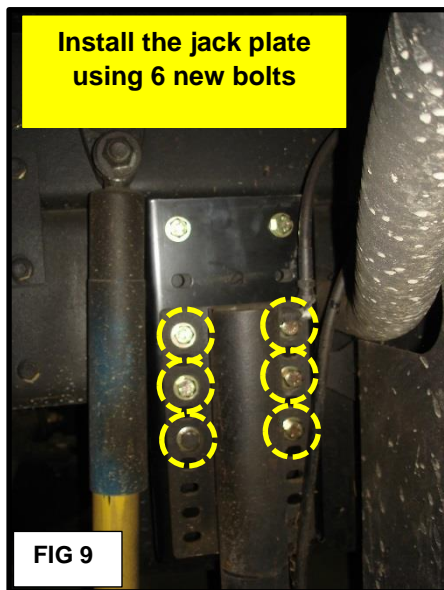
Install the jack leg and plate to the support bracket with 6 new bolts and flat washers. Nuts may be already welded behind the support plate for the 6 bolt locations for the jack plate. If they are not, the 6 new flange nuts included in the parts kit must be installed behind the support plate.
